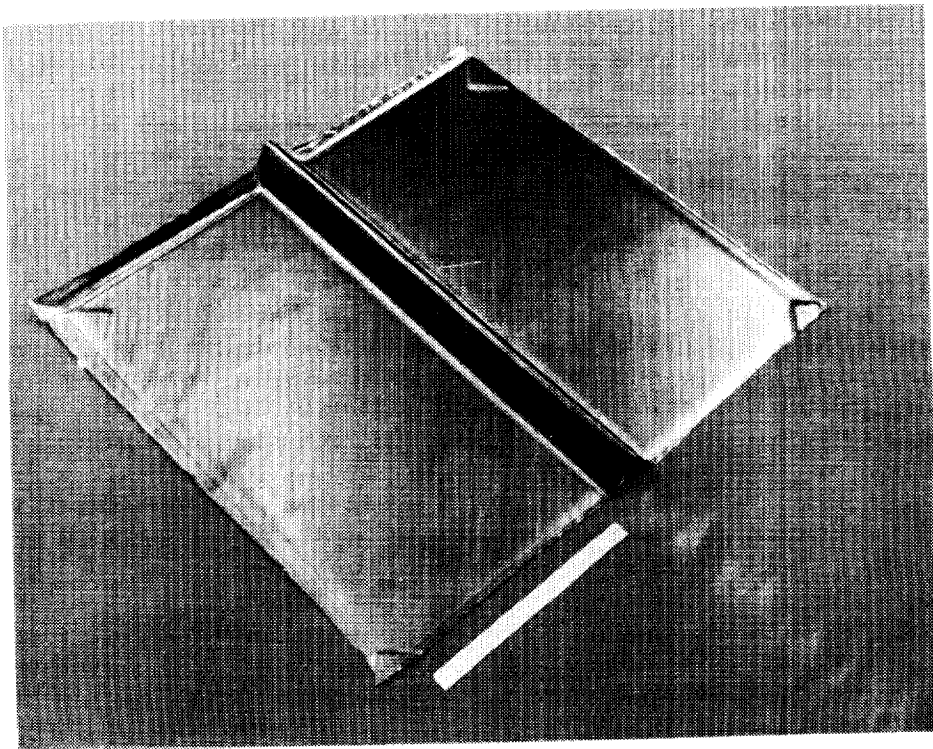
Typical Two-Step Diaphragm Formed 60° Y-Frame Element
